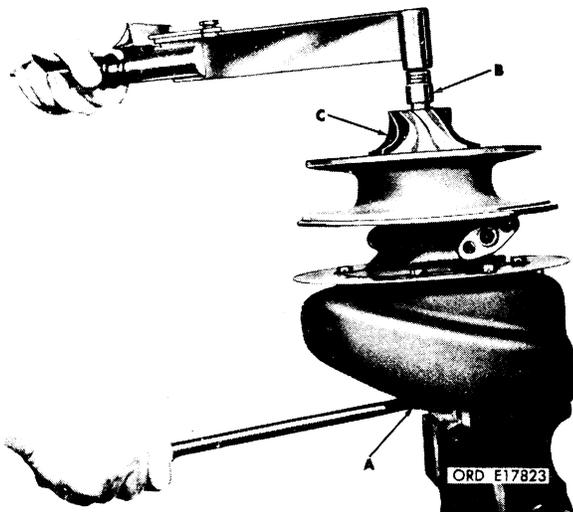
REMOVING COMPRESSOR WHEEL LOCK NUT.
